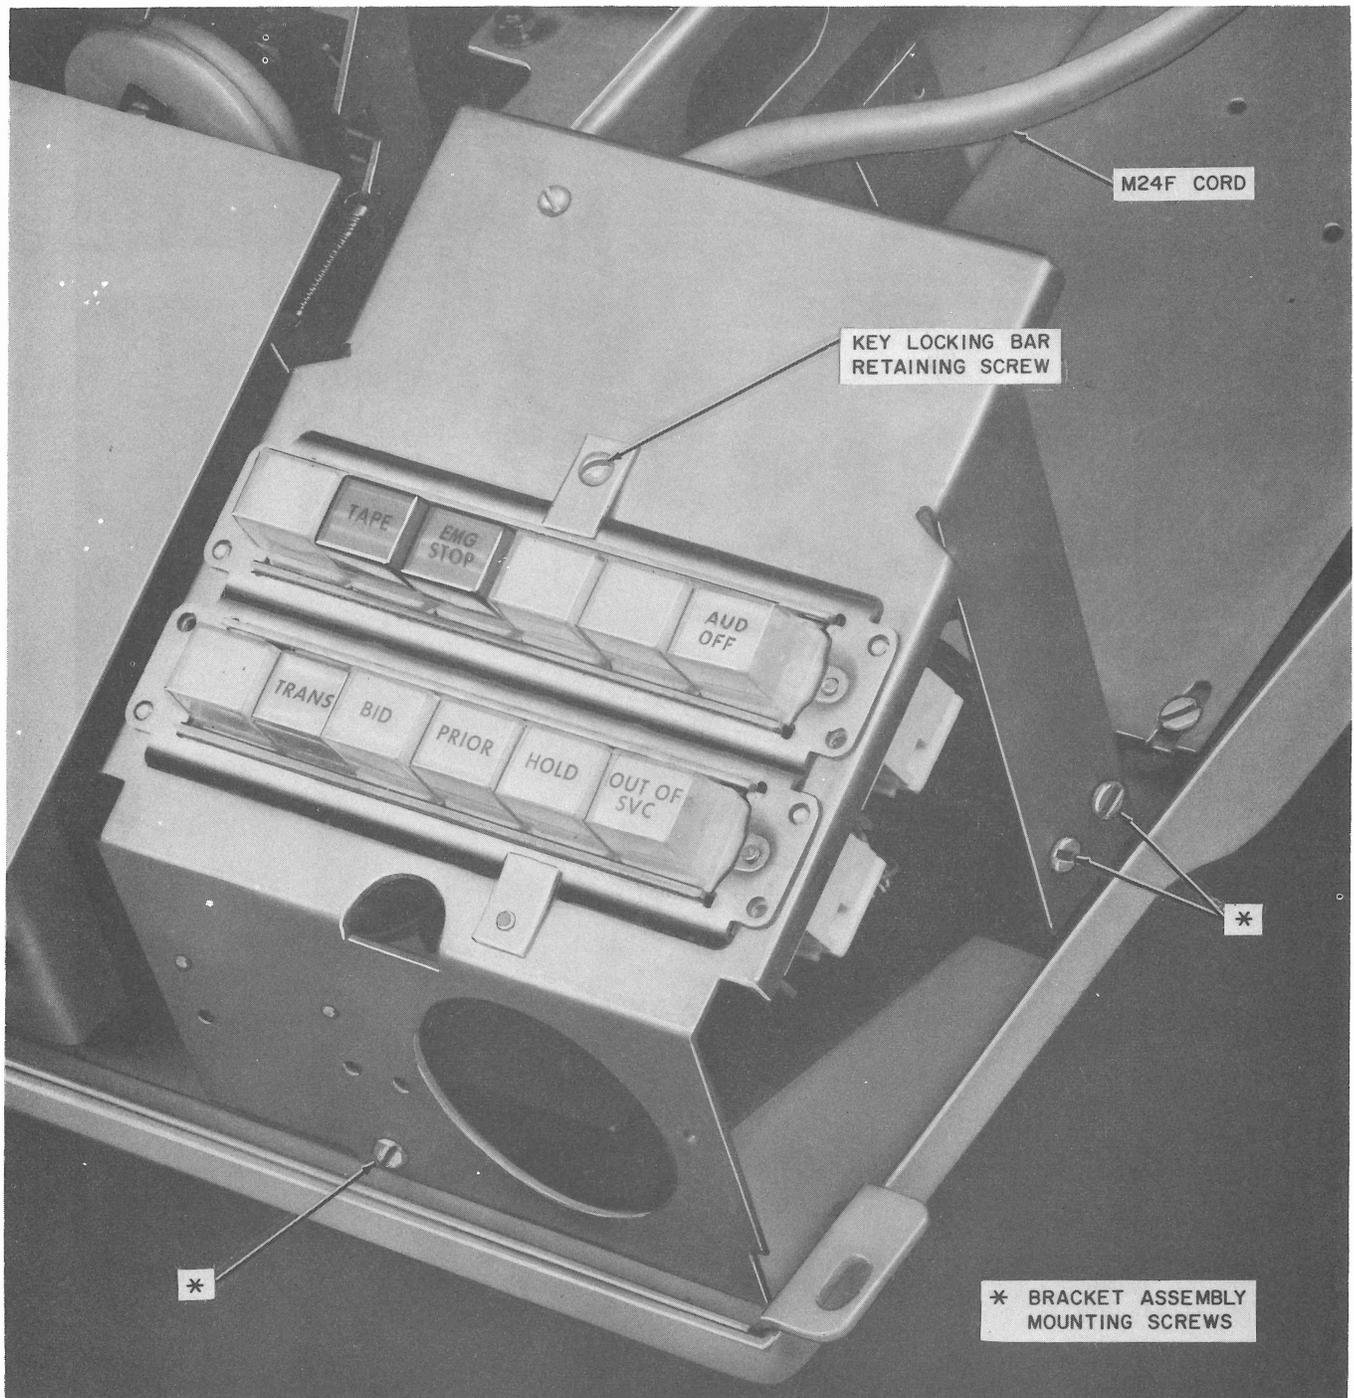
Data Auxiliary Set 804N1, Mounted in Model 35 ASR Teletypewriter
